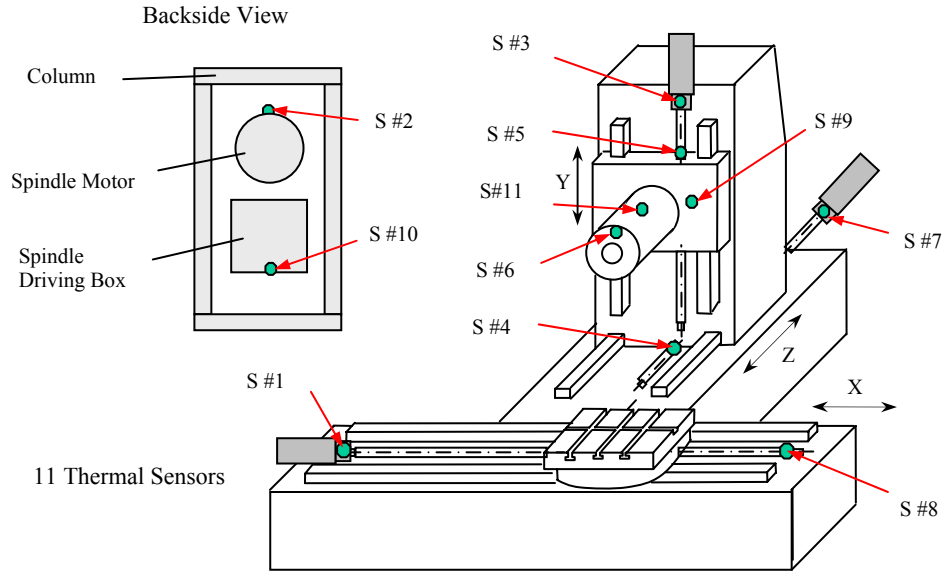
Thermal Sensor Locations on a Machine Tool
